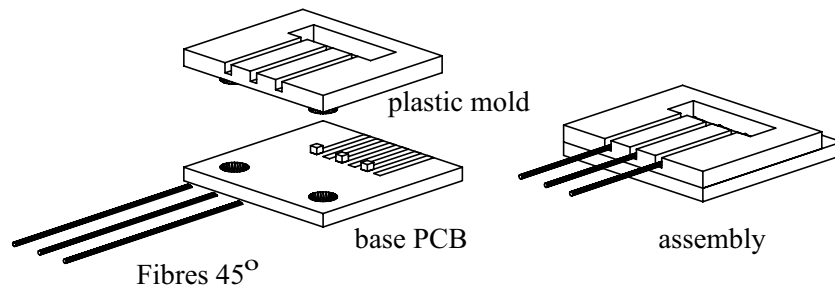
Drawing of the Taiwan Opto-Package in part and assembled (“2+1” version).
